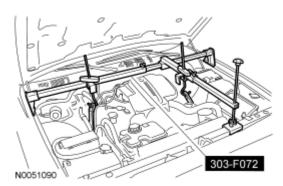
Engine Support Tool Courtesy of FORD MOTOR CO.
